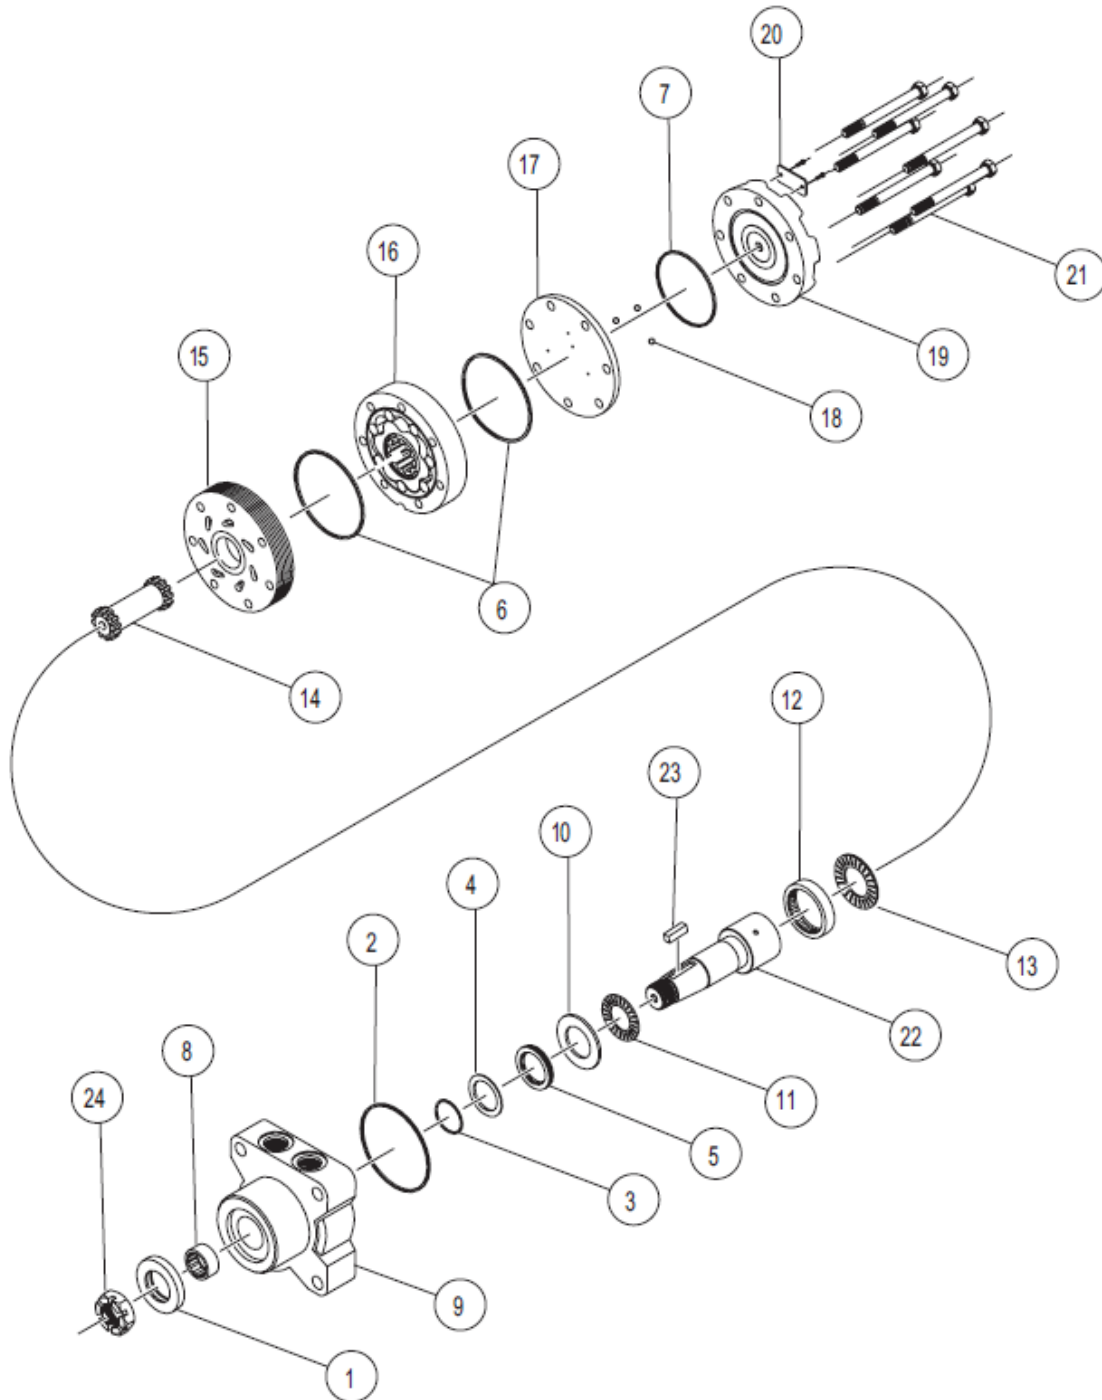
CE [410, 411, 420 & 421] Exploded view (WITH FRONT HOUSING BEARING)
